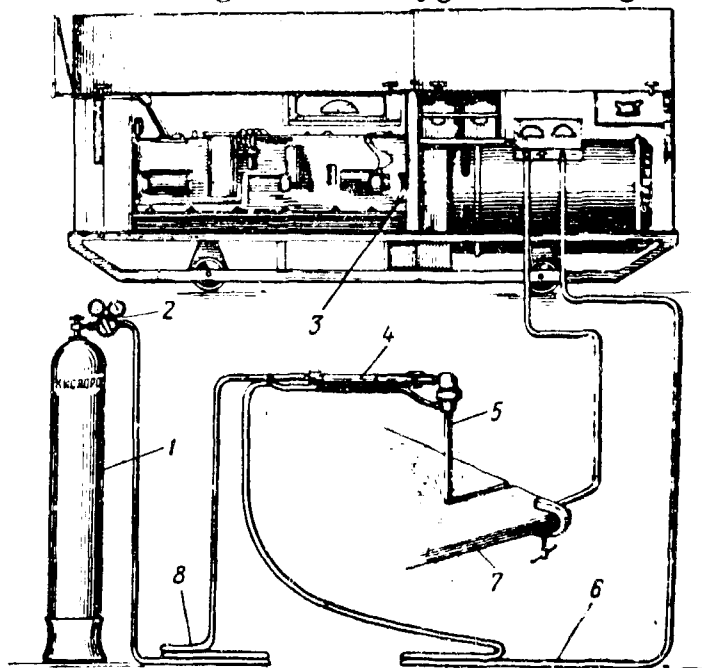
Arrangement for Underwater Oxy-Electric Cutting of Metal: 1 - tank containing oxygen; 2 - reducing valve; 3 - welding subassembly; 4 - electrode holder; 5 - electrode; 6 - welding cable; 7 - object being cut; and 8 - oxygen hose.
